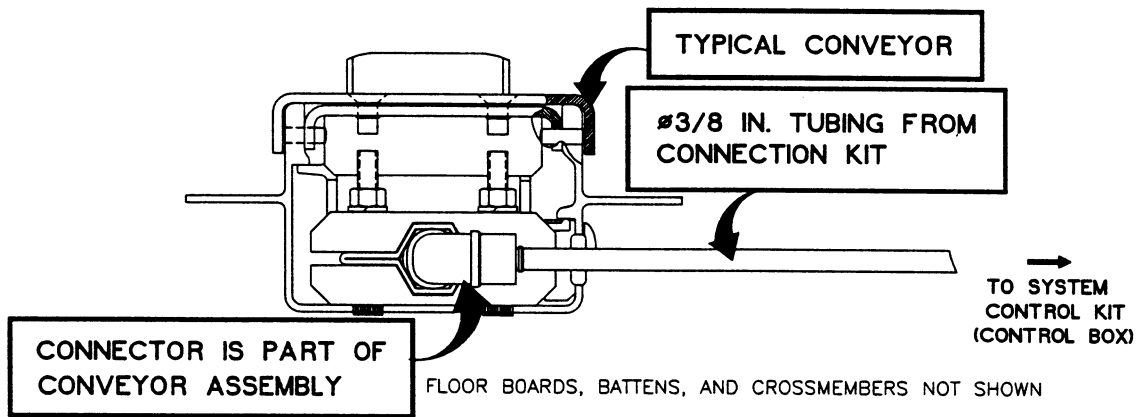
on page 27, shows typical attachment of fittings to Conveyors.
